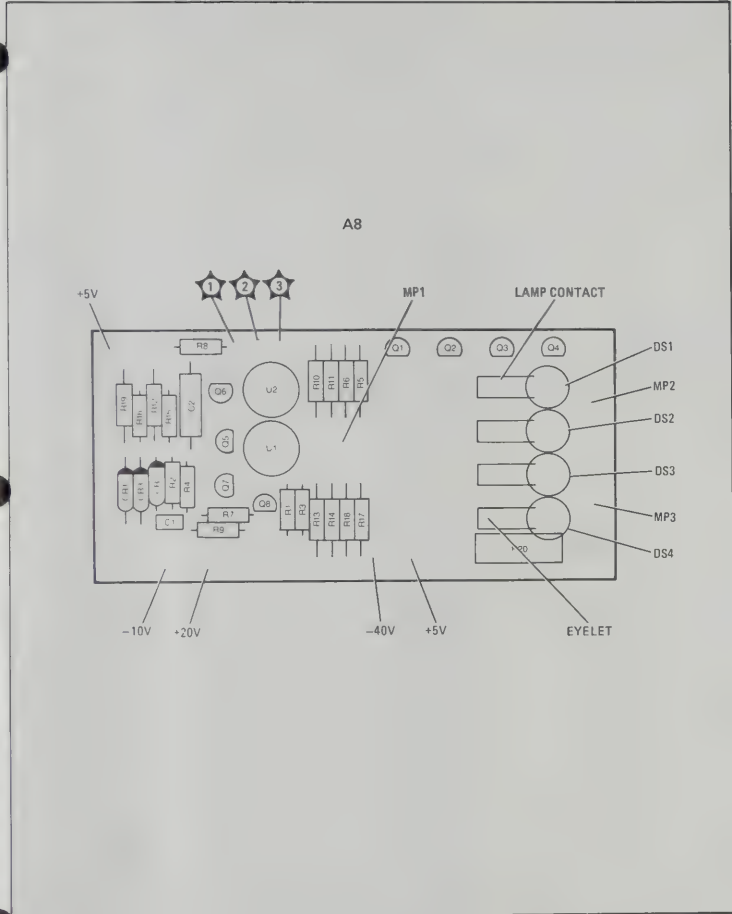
A8 Lamp Driver Assembly, Component Locations
